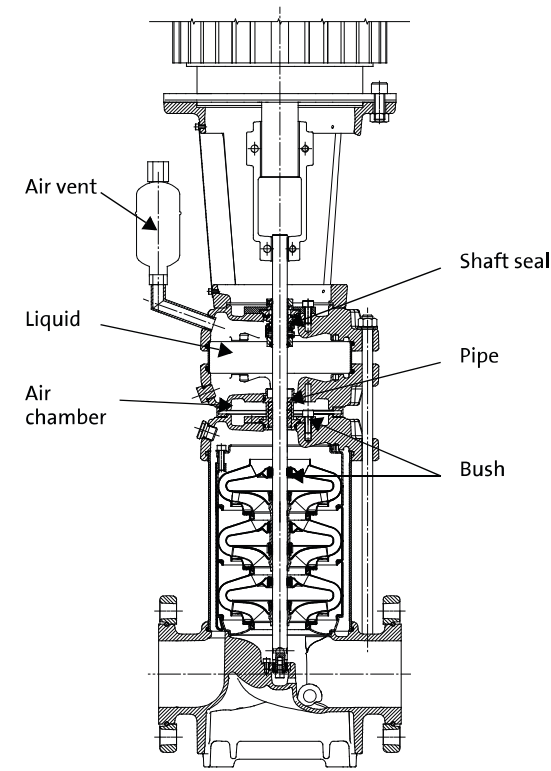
Drawing of a SCR pump with an air-cooled top assembly
